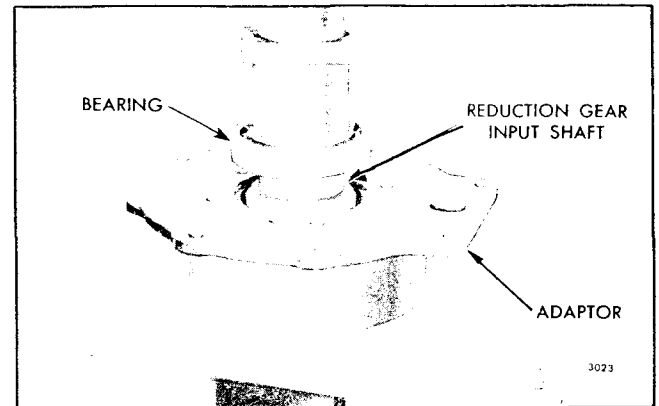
Installing Reduction Gear Input Gear Bearing on Input Gear (1.5:1 Ratio)
